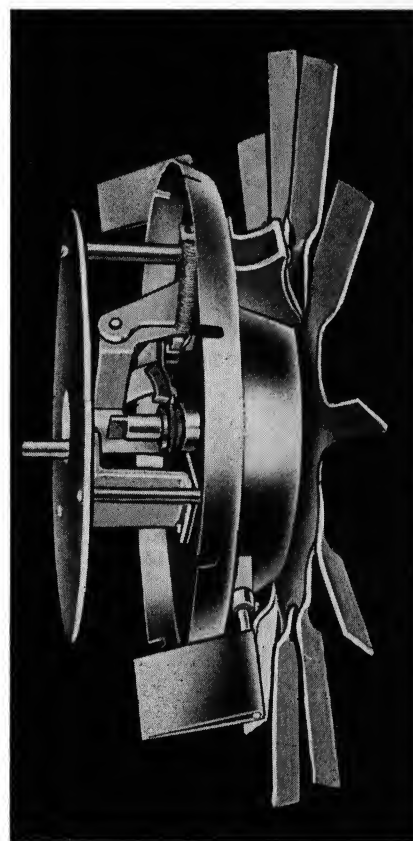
Fuze and Initiating Device Mk 151 (Side View)
